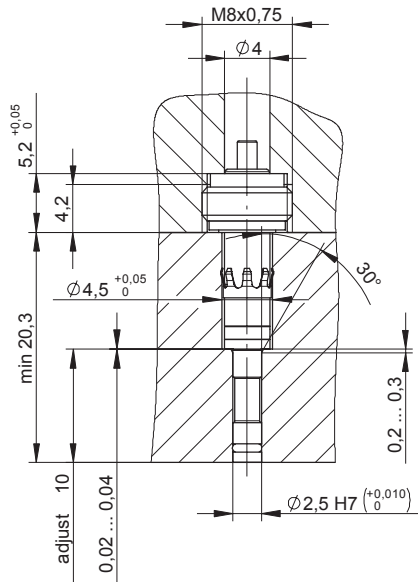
Installation of the Types 6182C...N... with conducting spacer sleeve
